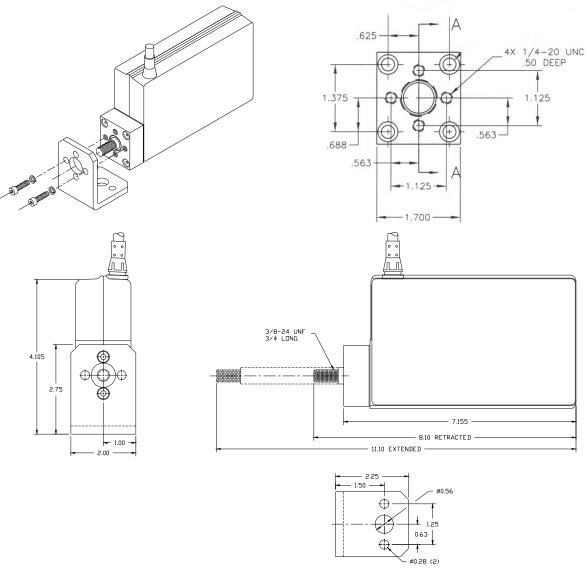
723 Series Actuator with Mounting Bracket (dimensions in inches)
